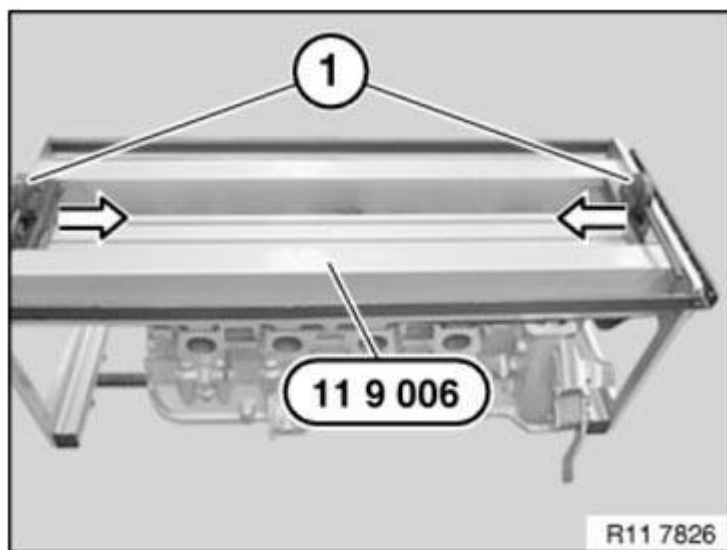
Sliding Locks In Direction Of Arrow And Pretension With Eccentric Shaft
